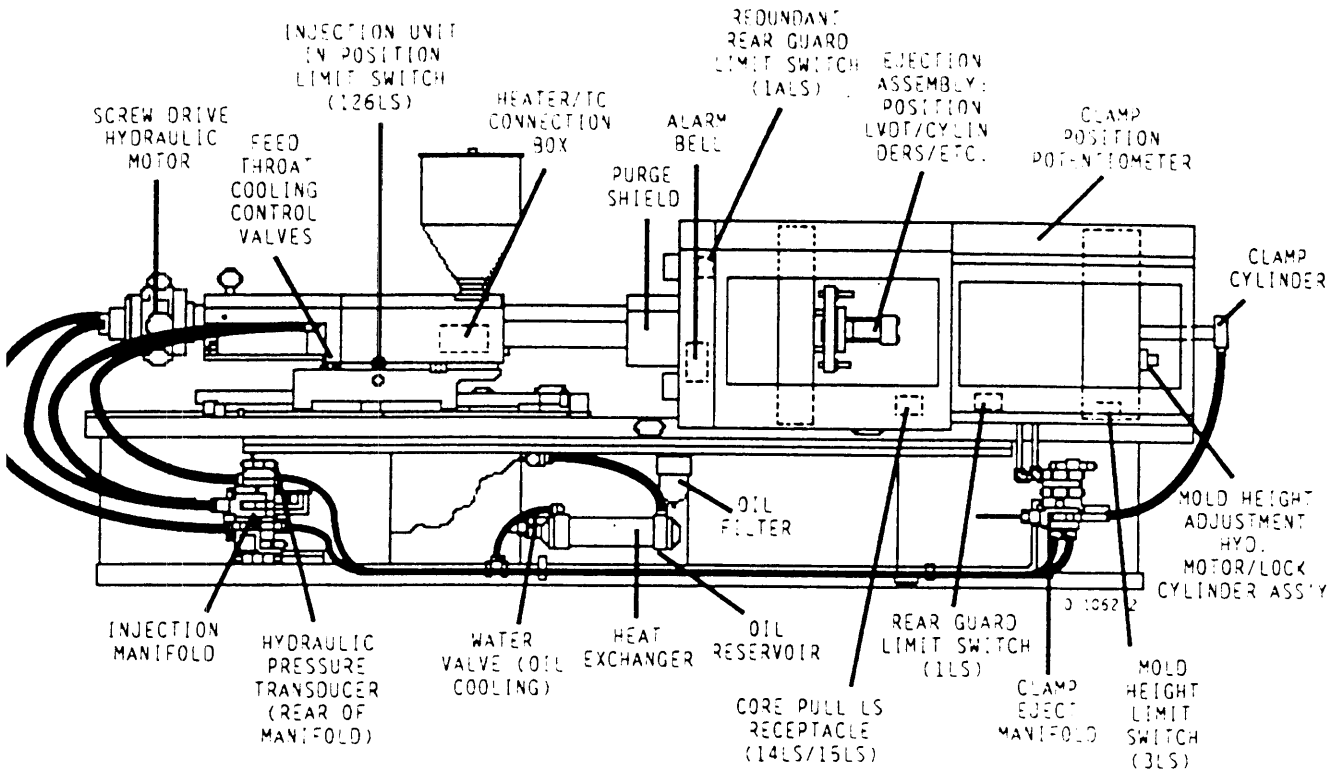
TOGGLE CLAMP INJECTION MOLDING MACHINE - REAR VIEW
